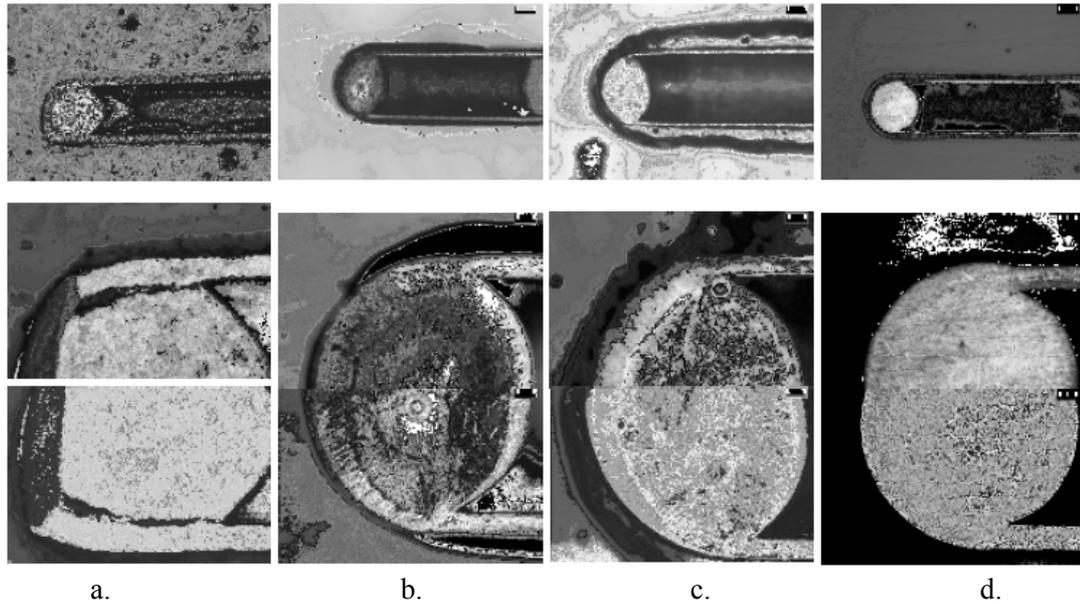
Laser welds of titanium tubes (a) with plugged tip, (b) with open tip, (c) with squeezed tip oblong, (d) with squeezed tip in three-armed star shape
